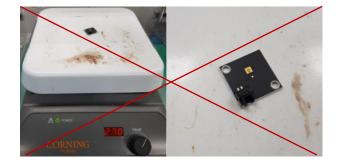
Do not use a hot plate to mount led-package onto PCB. A reflow oven is recommended.
